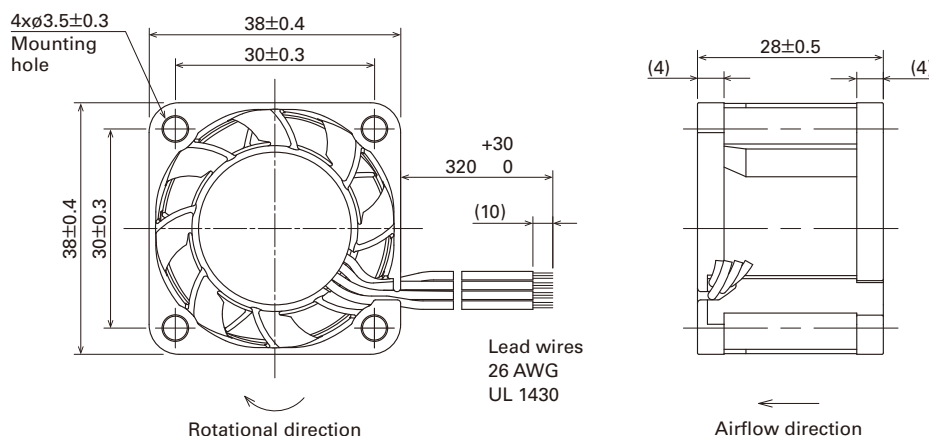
Dimensions of 38 × 38 × 28 mm *San Ace* 38 9HVA type (Unit: mm)
